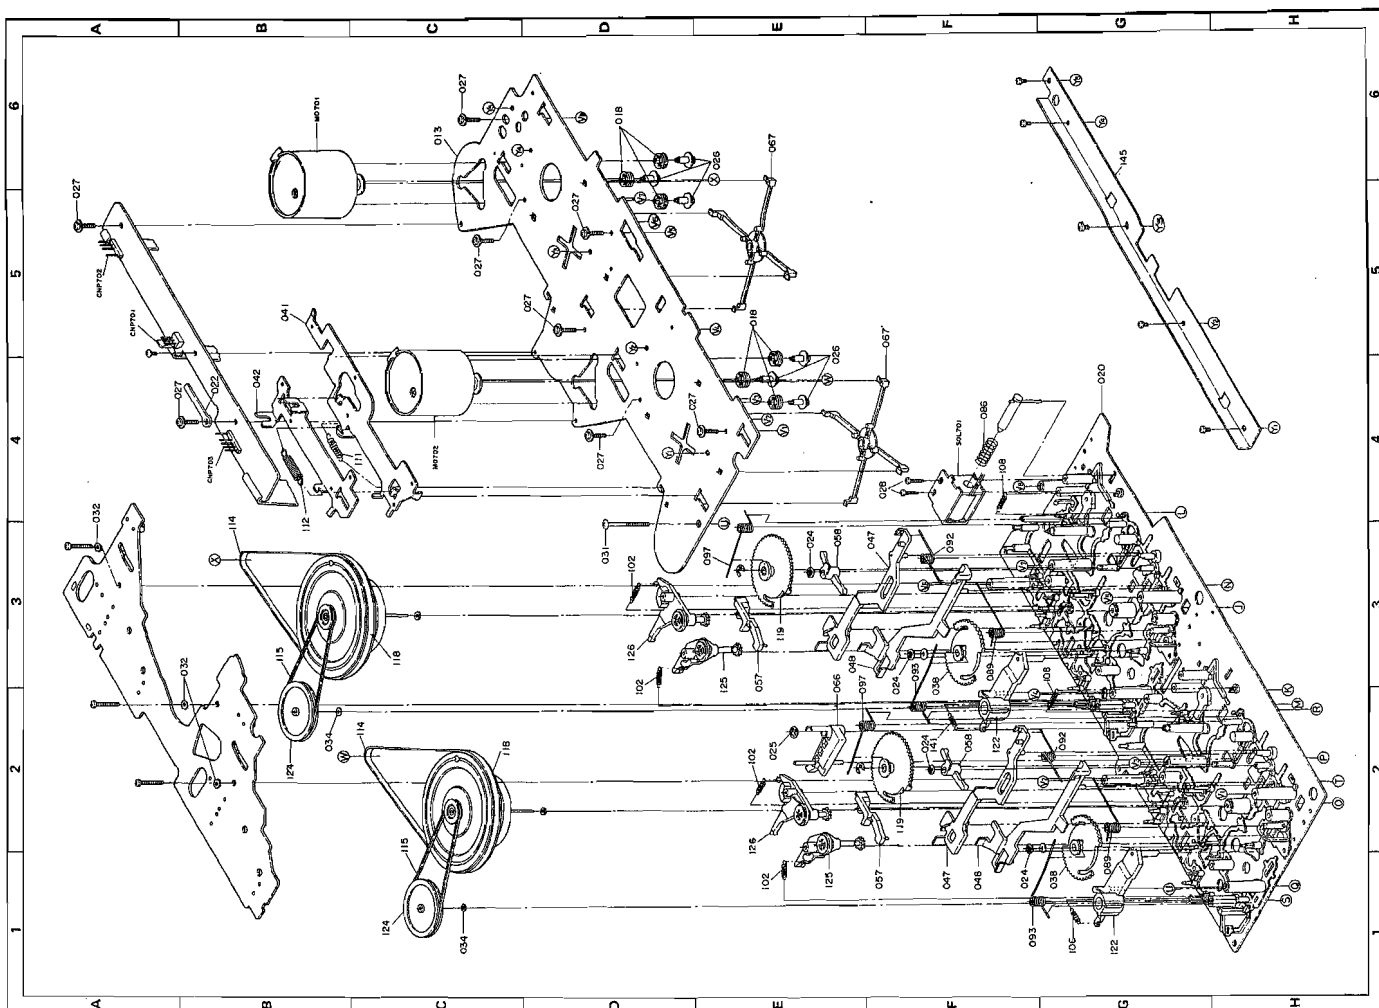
MECHANISM EXPLODED BOTTOM VIEW
